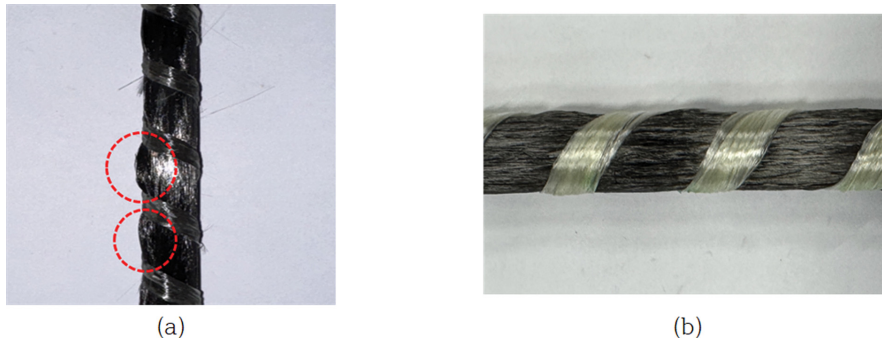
Case of improperly manufactured FRP: (a) FRP abnormal molding and (b) Insufficient surface coating due to resin.
